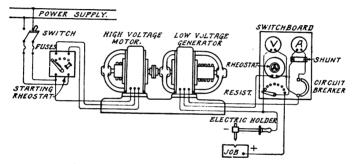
Elementary D.C. Arc-Welding Equipment
